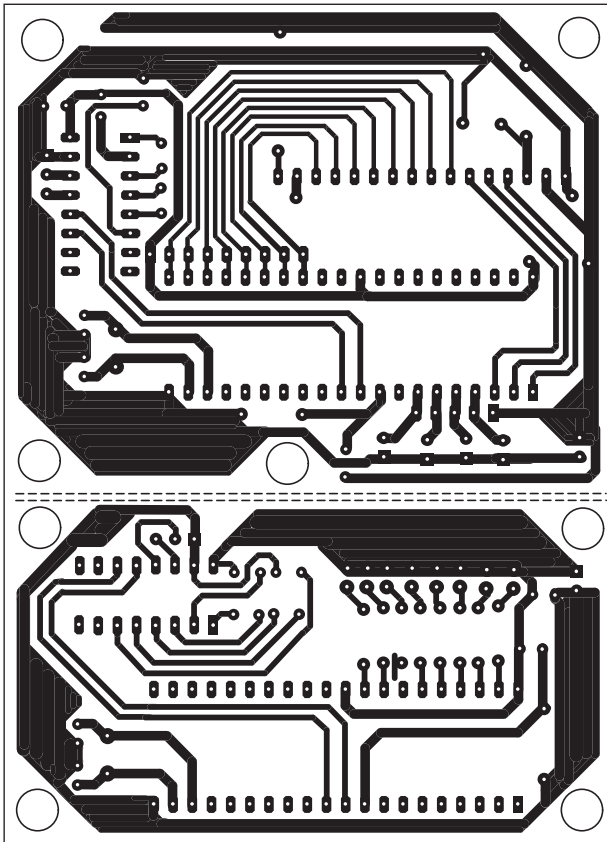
Actual-size, single-side PCB layout for the handheld unit comprising LCD module (above) and the control unit (below)
